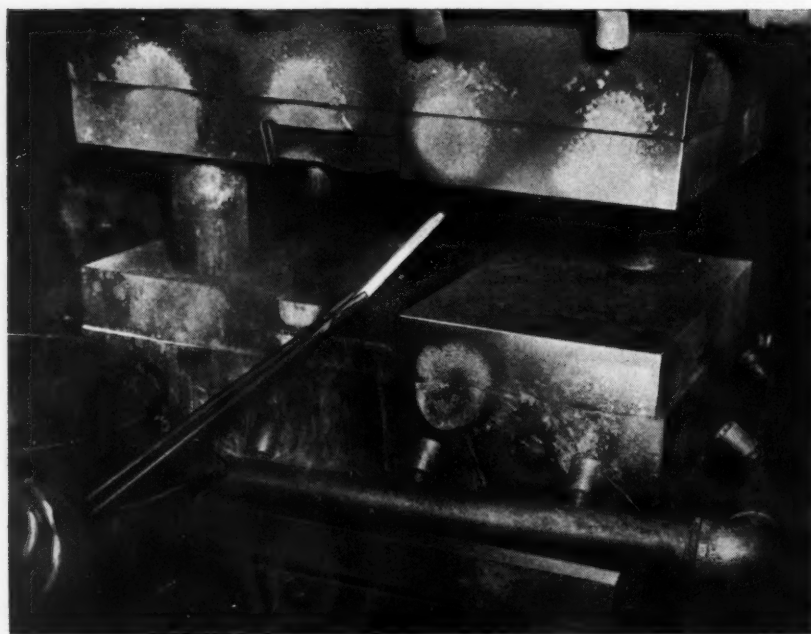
Another View of a Forging Die, Showing a Hot Magnesium Bar being Held in Place, Ready for the Forging of Comparatively Small Parts. The Extruded Magnesium Bar is Heated to 725 Degrees F. for the Operation
